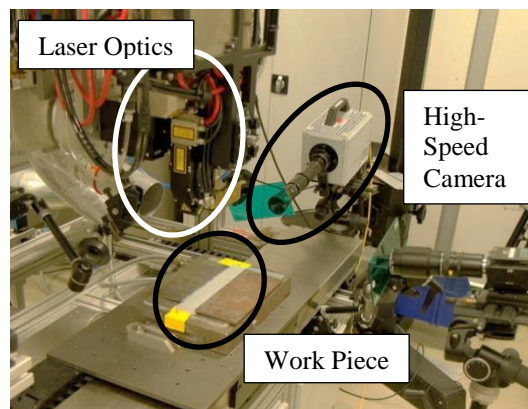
Experimental set-up to quantify the spatter occurrence when welding aluminum.
